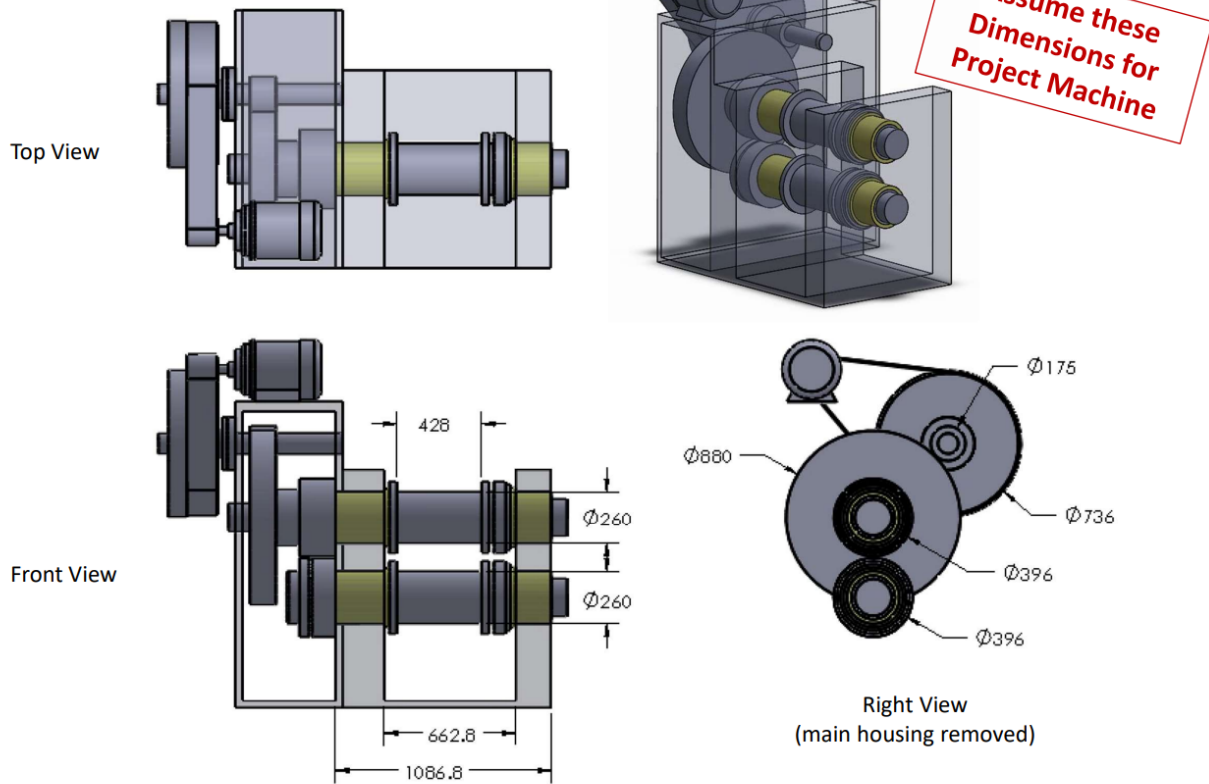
Simplified CAD machine design details (dimensions are in mm)
